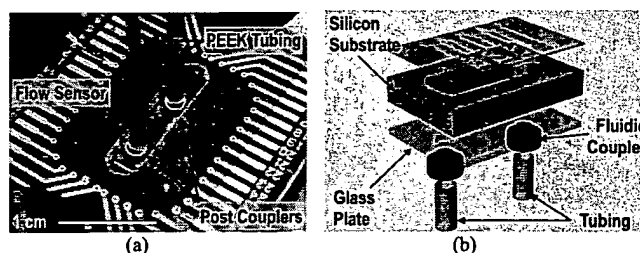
(a) Backside of packaged flow sensing array showing microfluidic couplers and (b) exploded 3D drawing of flow sensor components and assembly.
